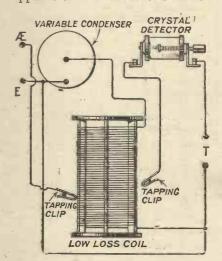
A pictorial drawing of the circuit, showing how to join up the various parts.
